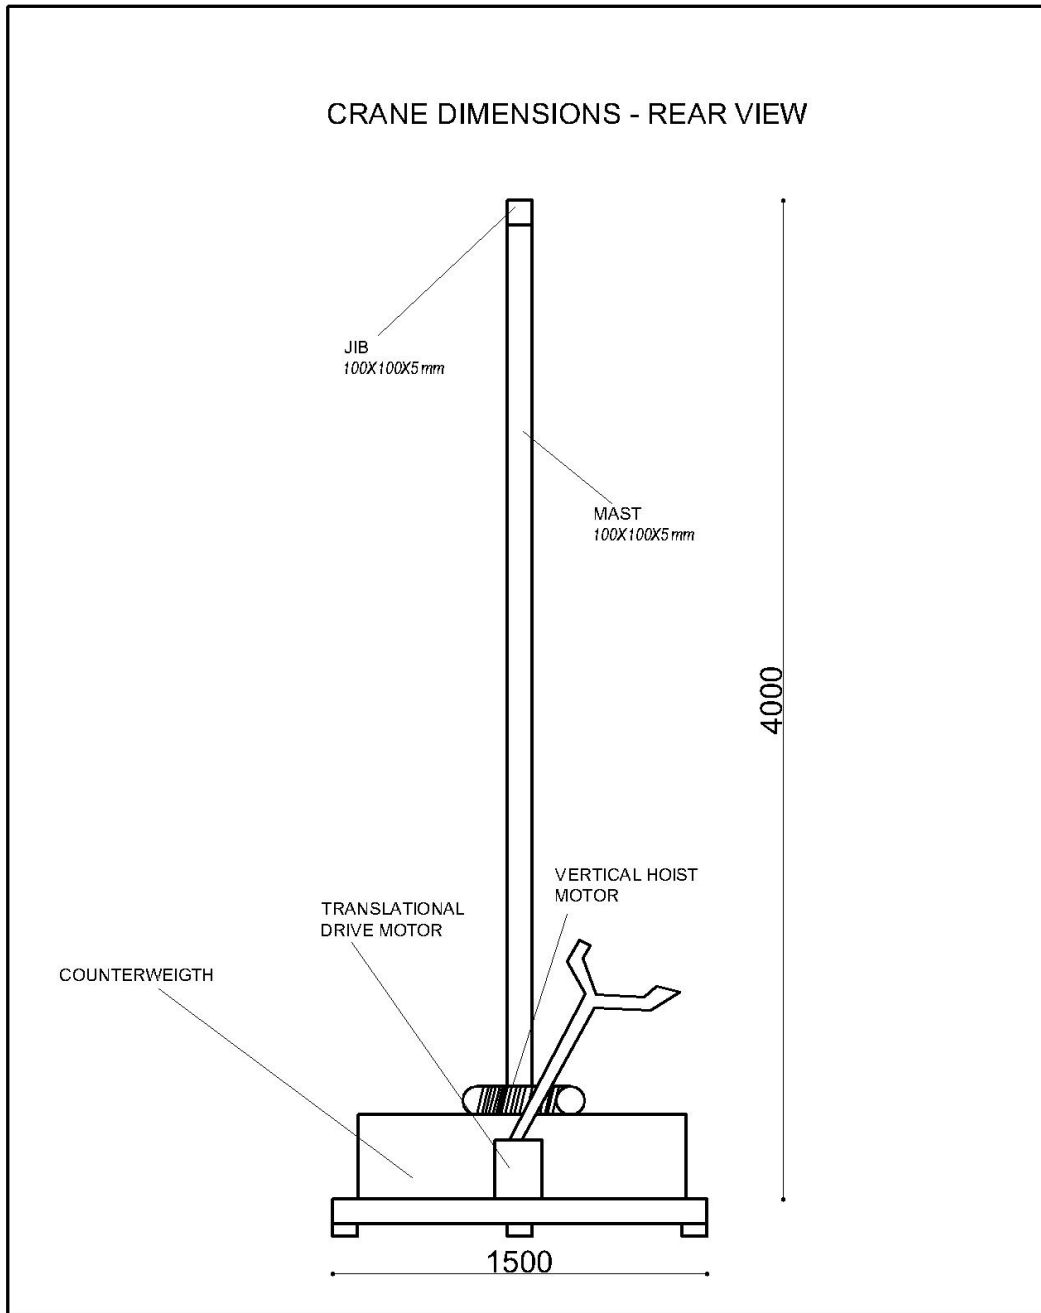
Shop Crane Dimensions and Structural Sections.
